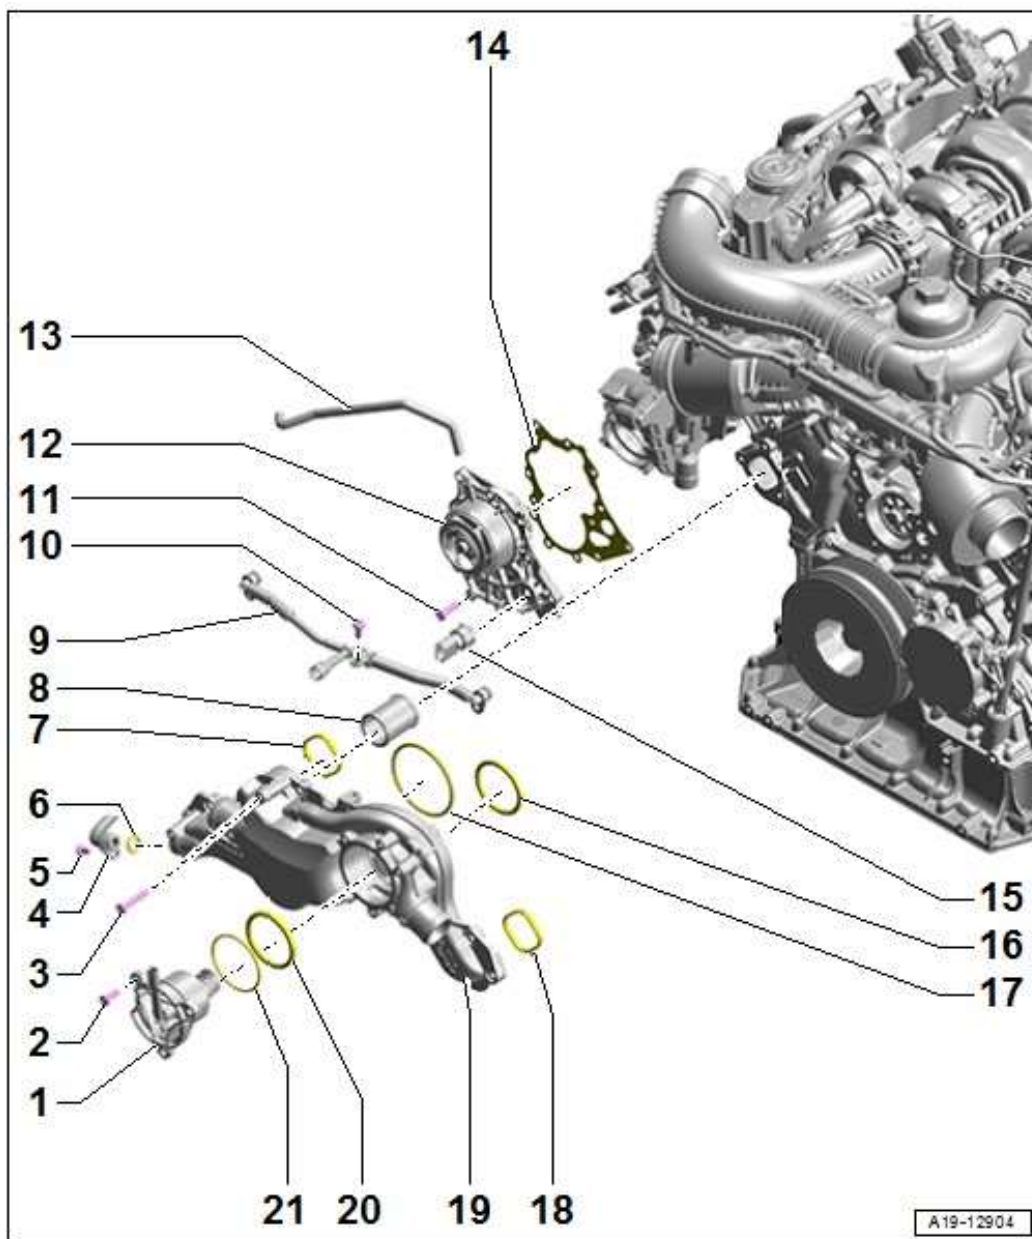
Assembly overview – coolant pump/thermostat incl. switchable mechanical coolant pump, number 12.
